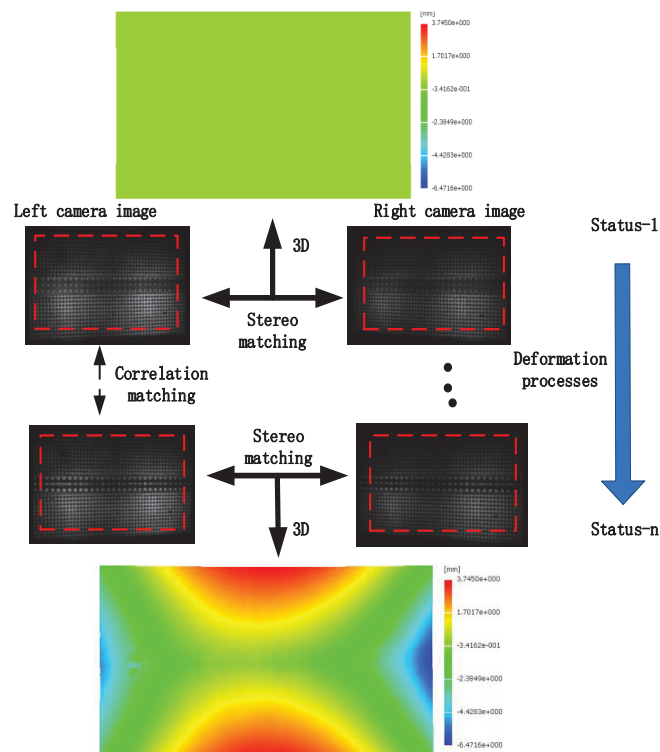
Three-dimensional detection method of plate welding deformation.
